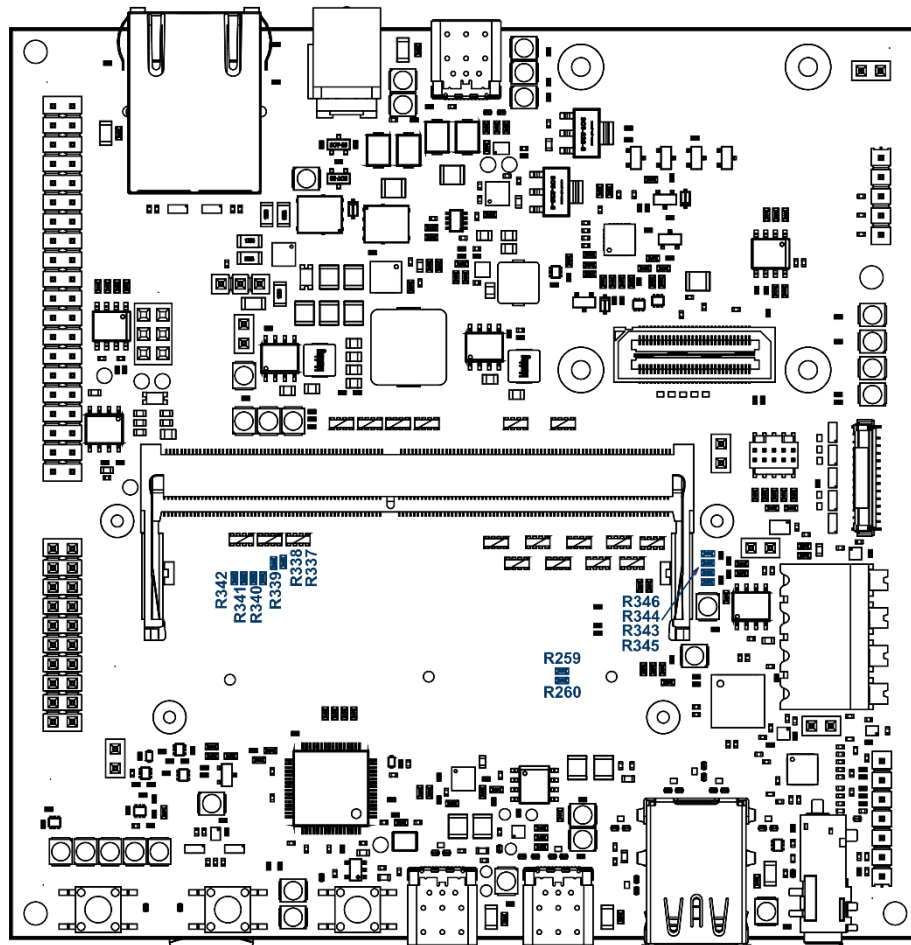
Dahlia Carrier Board Assembly Options – Top Side
